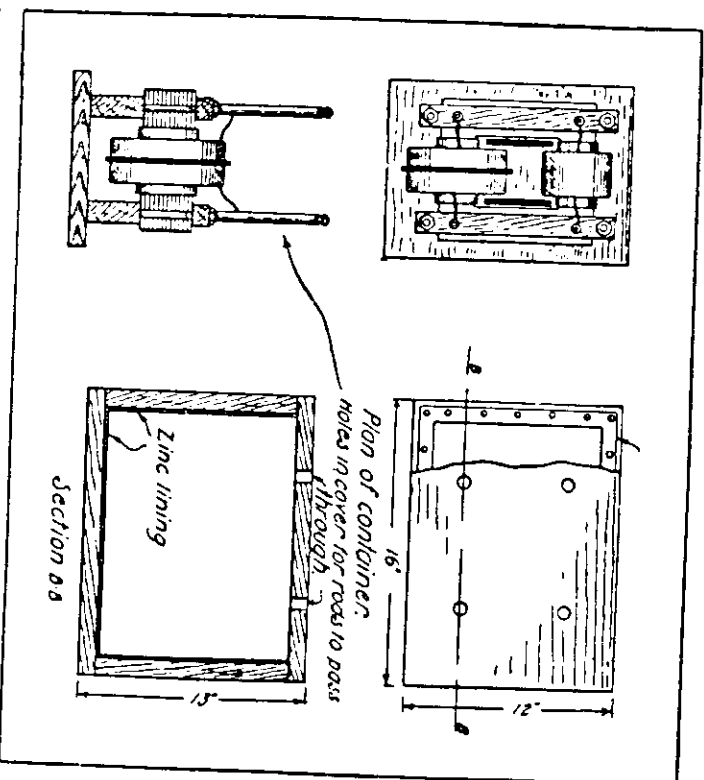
to 98 inclusive—Details of the magnetic leakage transformer
